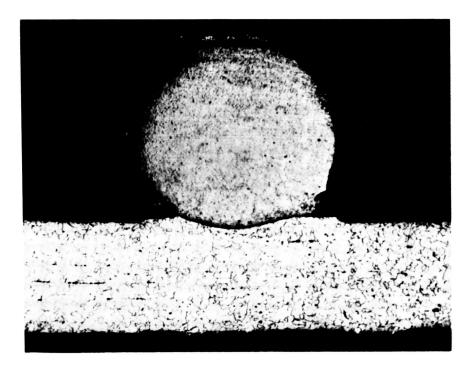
Weld joint 1.4. JPL 2; gold plated Dumet wire to Inco ribbon; sterilized; 150x magnification; Carapella etch (02330).
